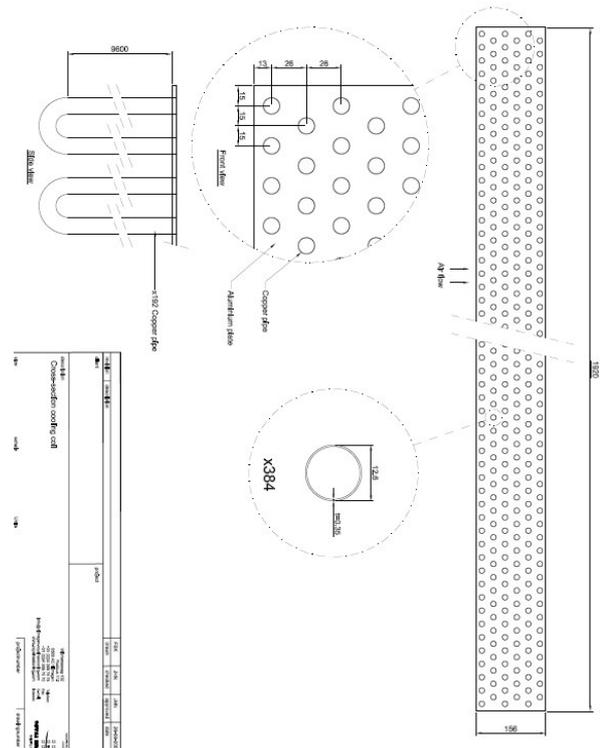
Detailed configuration of fins and tubes of the dry cooler
